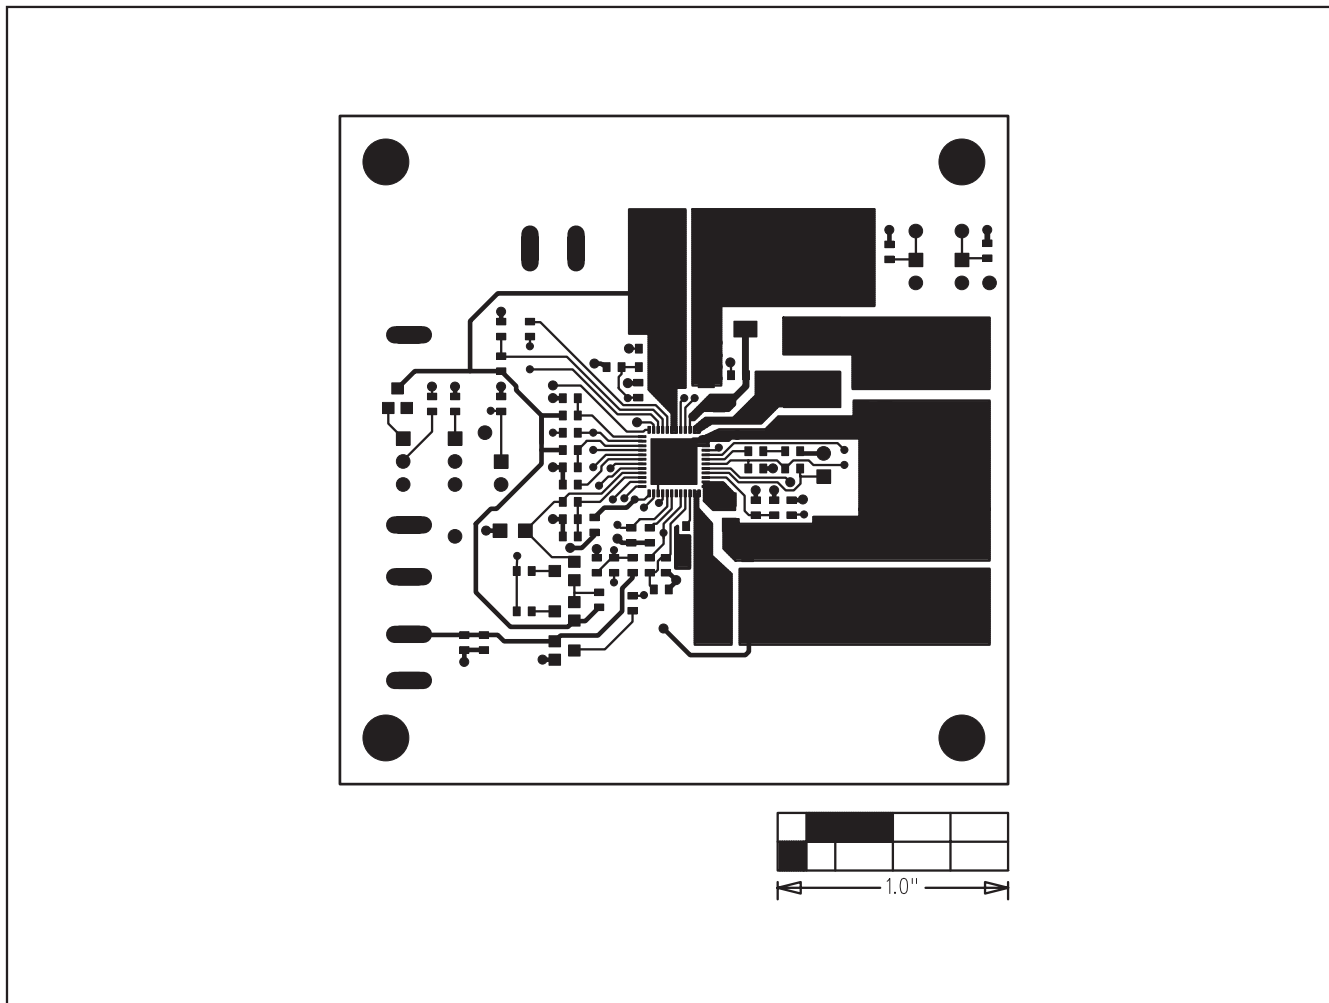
MAX17014 EV Kit PCB Layout—Component Side
